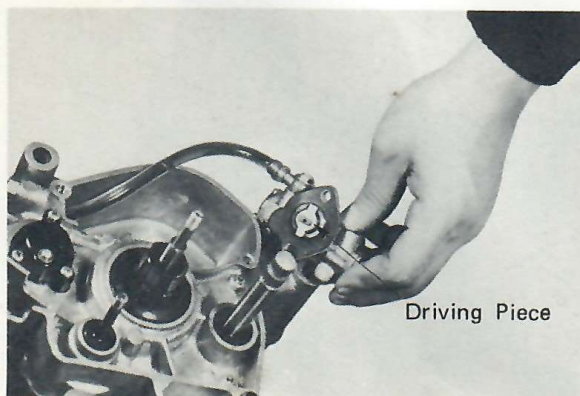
Installing oil pump driving piece on kick starter drive gear
